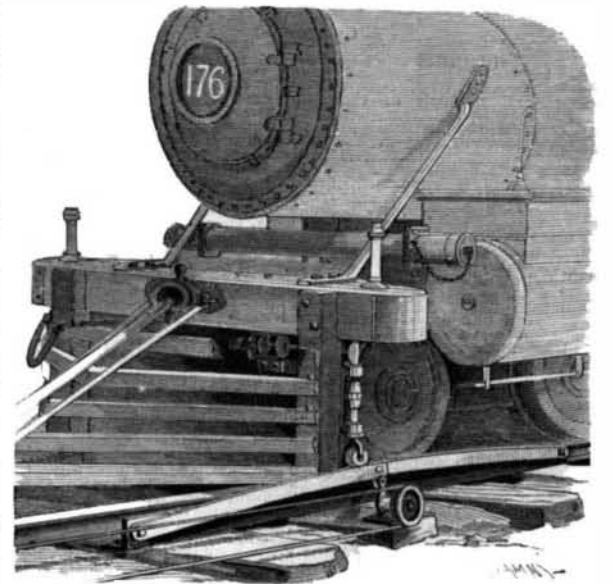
DETAILS OF ATTACHMENT TO LOCOMOTIVE, SHOWING MANNER OF STOPPING TRAIN.
